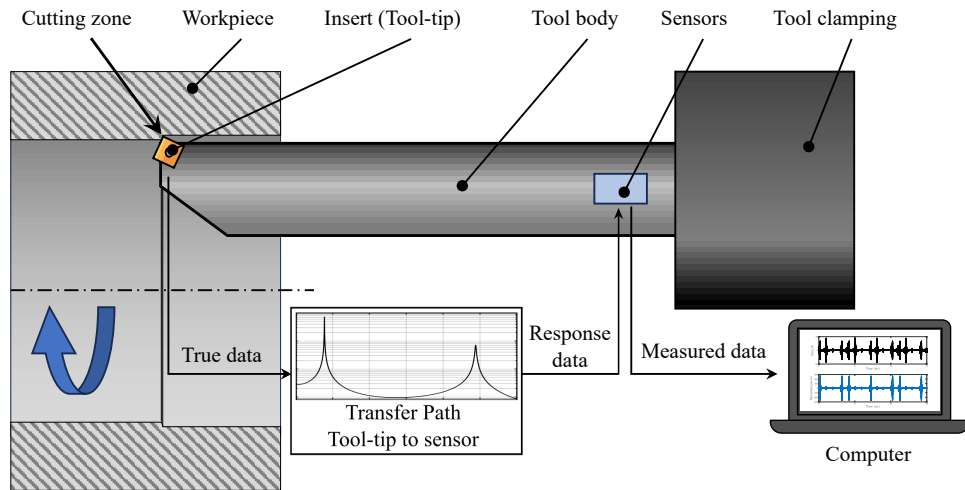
An illustration of the information gets distorted between tool tip and sensor location on a sensor-equipped cutting tool in a cutting process.
